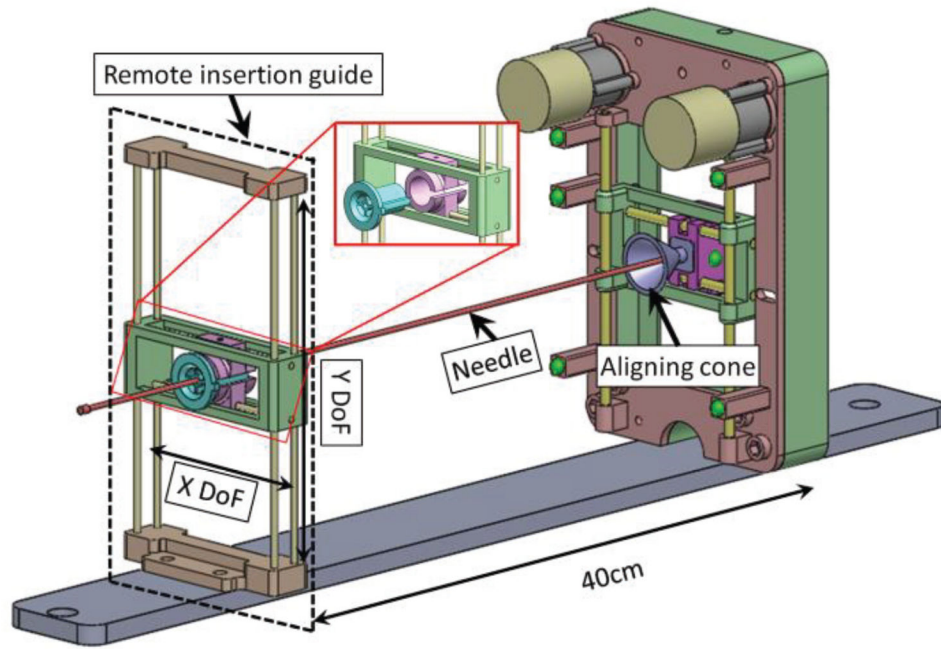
Assembly view of the remote insertion mechanism with the prostate manipulator. The remote insertion guide is located approximately 40cm away from the manipulator. The exploded view shows that removable core (green color in the exploded view, OD = 15mm, ID = 2.5mm) can be removed for the cooling catheter extension arm guidance.
